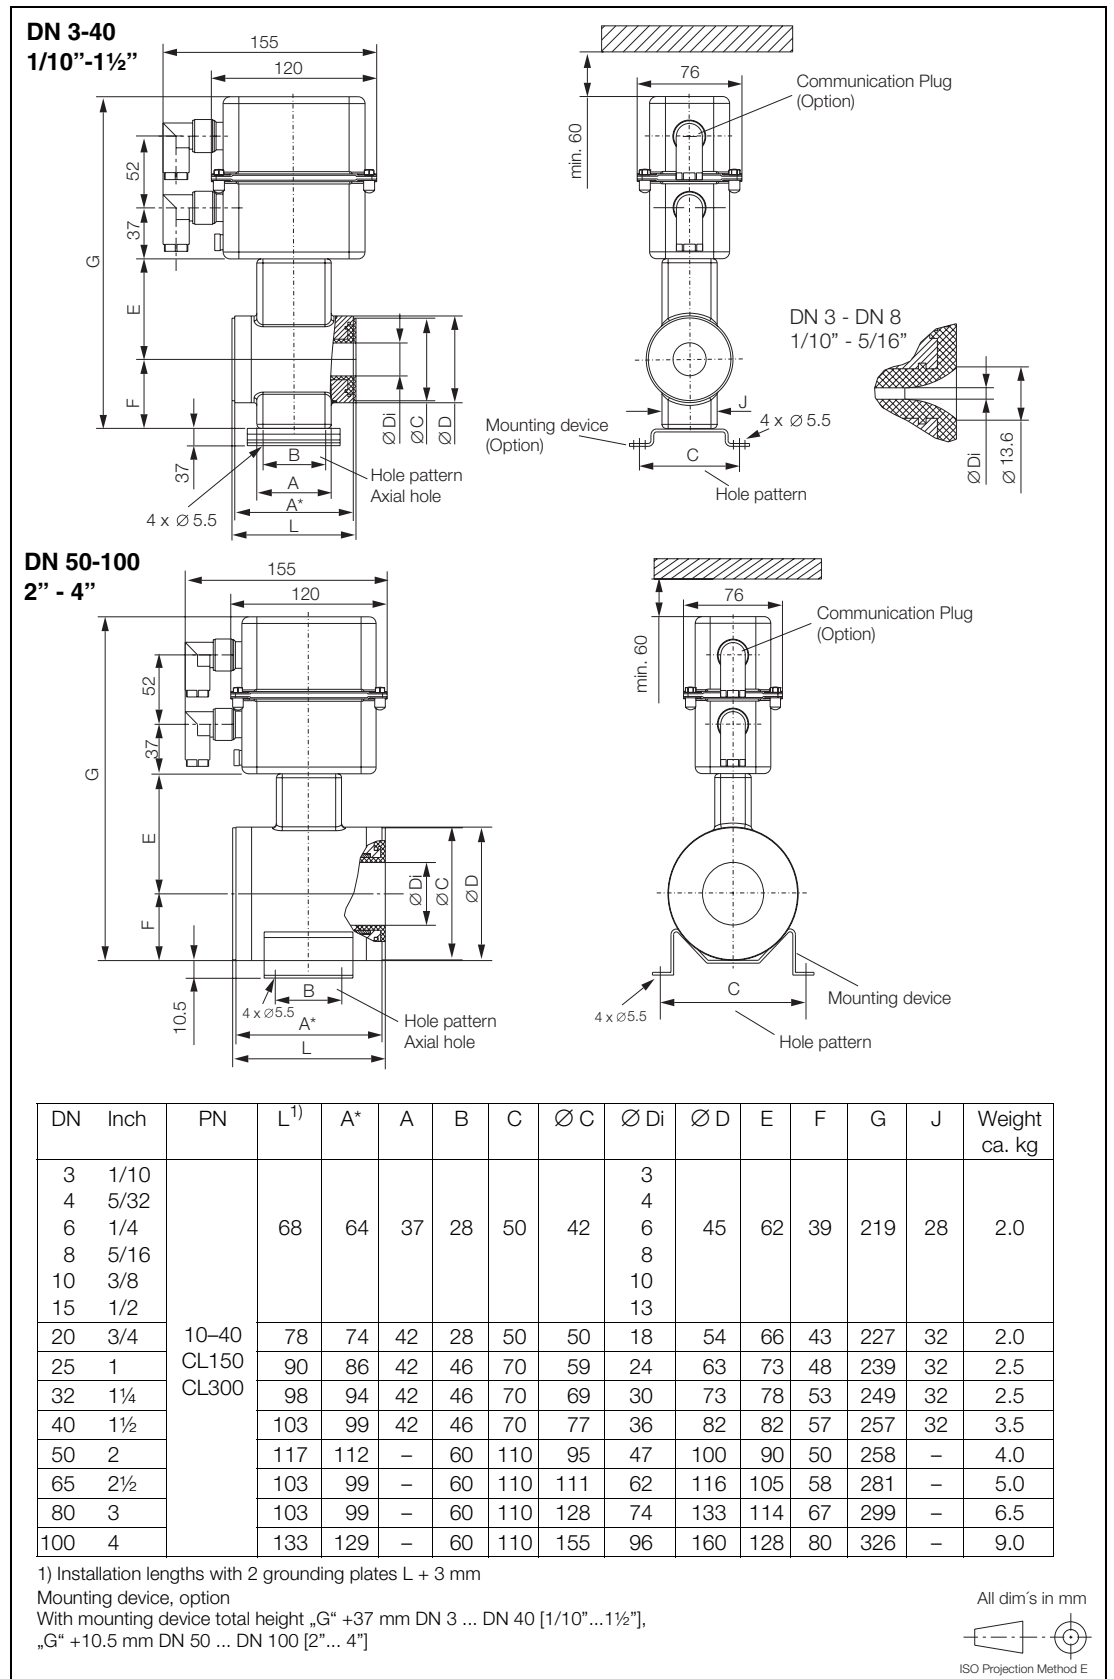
Dimension Drawing, Model DF23, DN 3-100 [1/10" - 4"], Wafer Design
